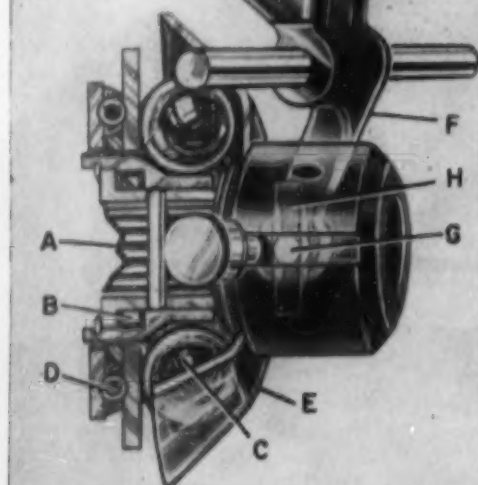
Governor used is of the simple ball and single-cone type, described in detail on opposite page.
